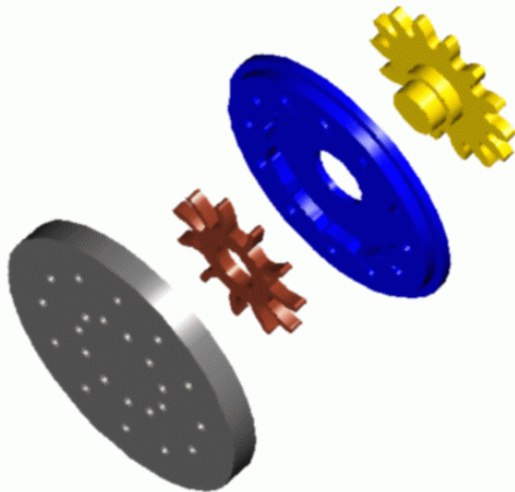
Exploded assembly drawing of the micro turbine demonstrator device consisting of perforated plate, rotor, nozzle plate and a gear wheel with integrated axis.
